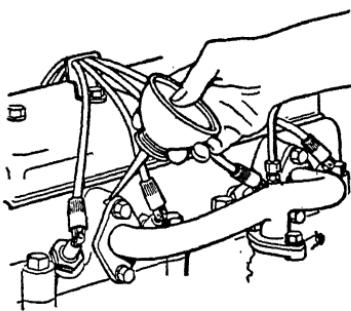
Using Gasoline to Check Inlet or Intake Manifold Gasket Leaks
